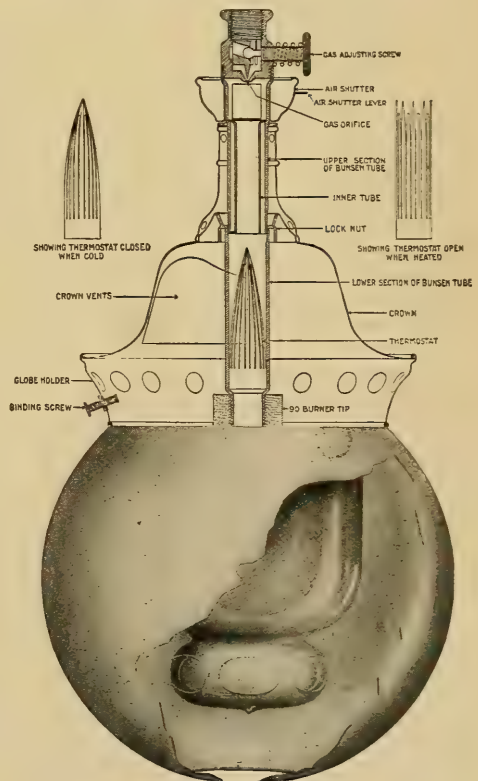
CROSS-SECTION OF REFLEX BURNER.
